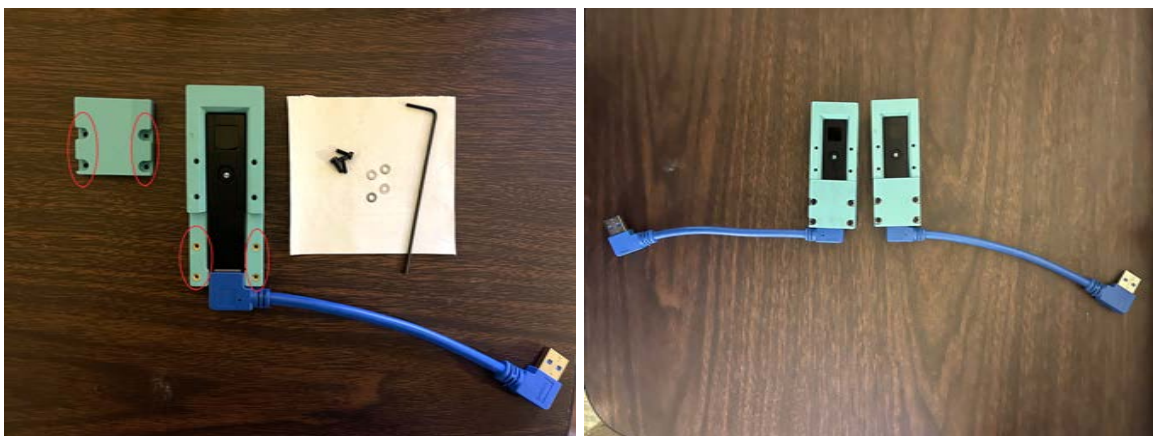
Mounting of part Pico\_Case\_Front onto Pico\_Case\_Back to secure the pico flexx.
